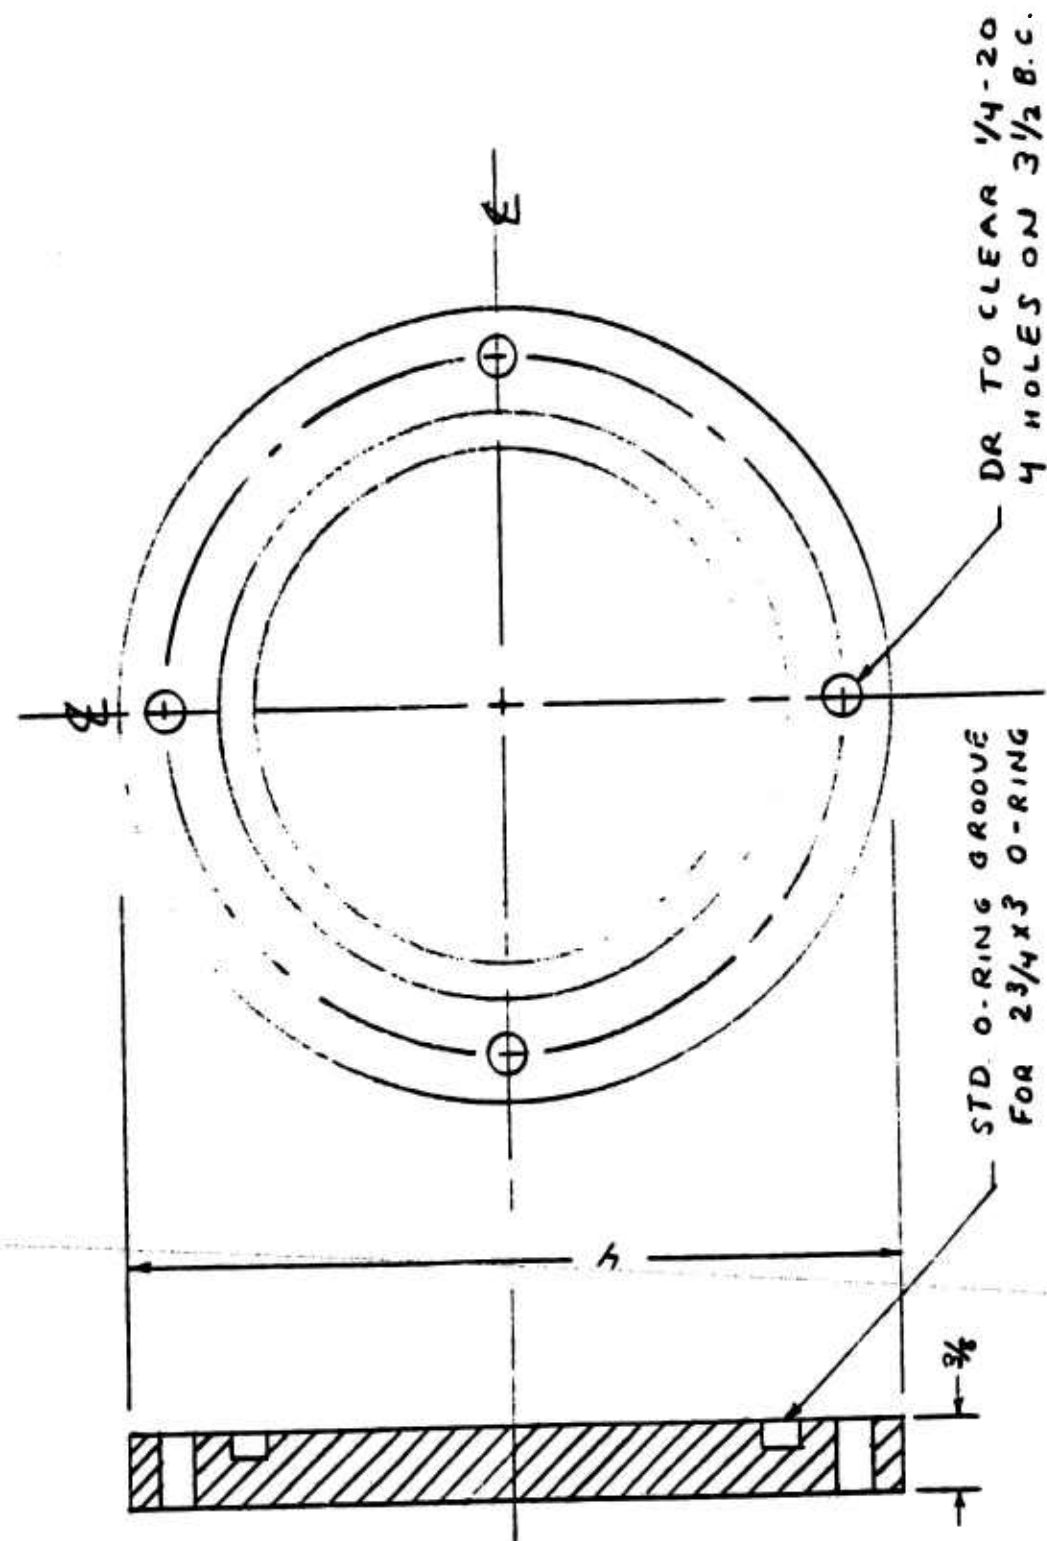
Blankoff Flange for Module Pumpdown and Testing
